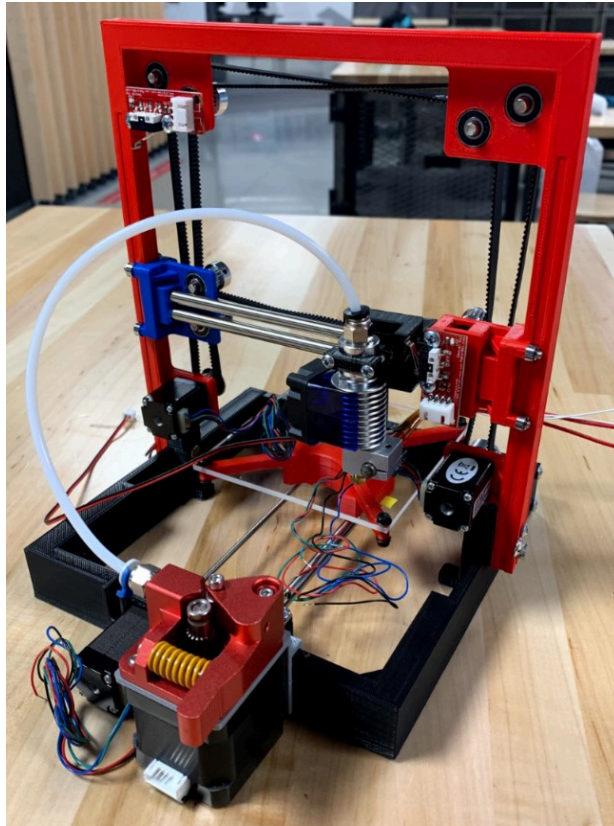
2020-2021 Palm Print Assembly (Rementer, Wehbe, & Wilkinson, 2021)
